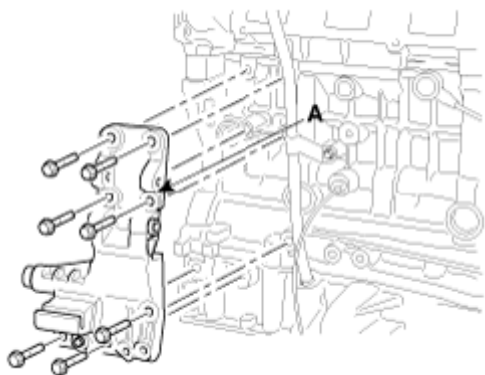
Identifying Tensioner Assembly Integrated Bracket
